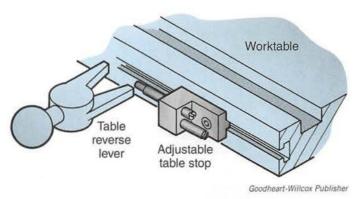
An adjustable table stop is used to regulate the length of the worktable stroke.
